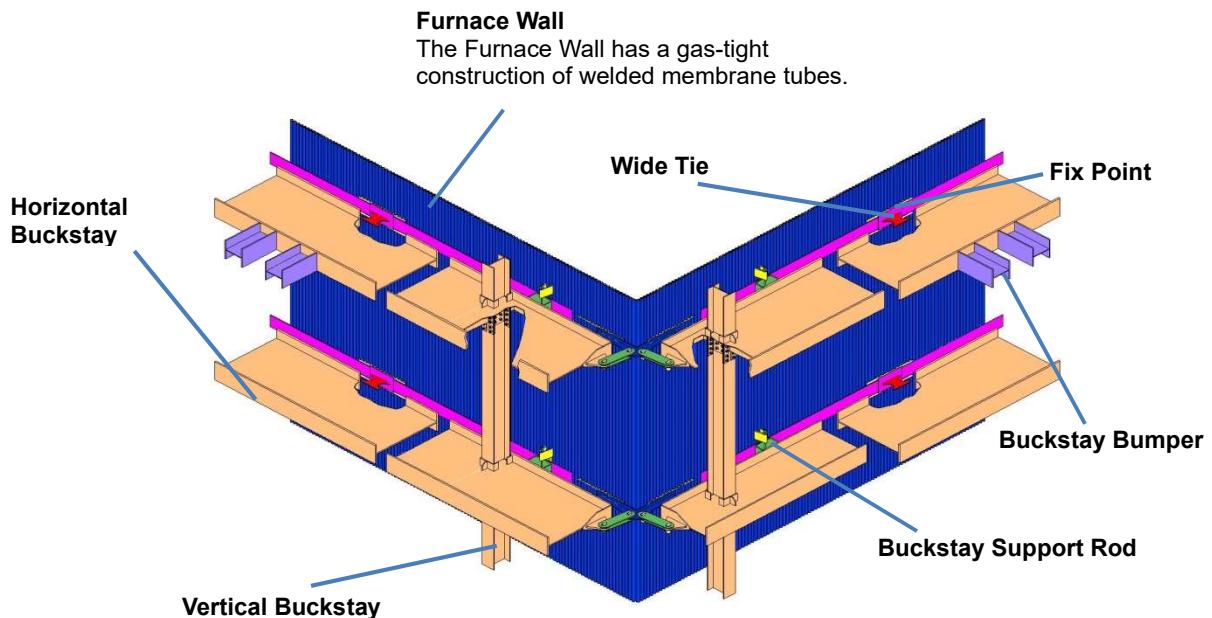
(b) Gas-tight Construction of the Furnace Wall
